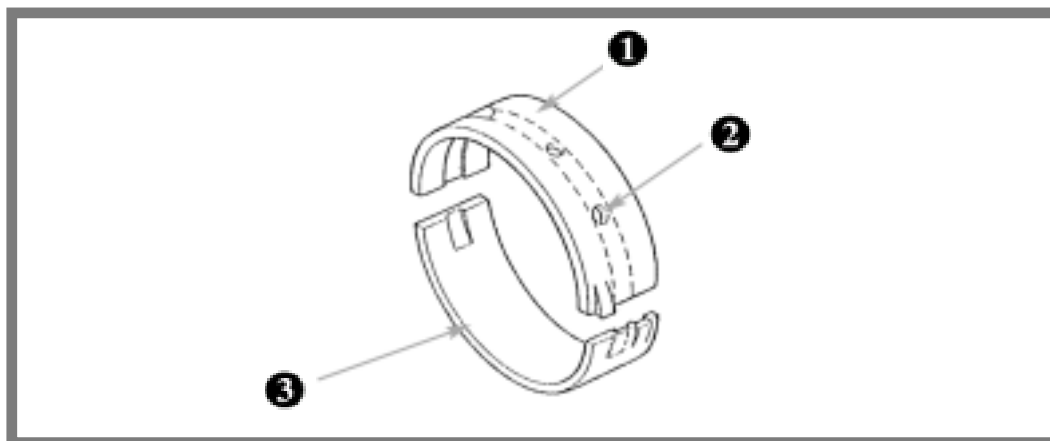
Crankshaft main bearings wrap around the main journals.
